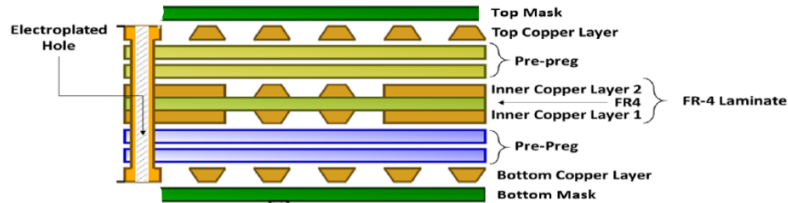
Cross-sectionals schematic of the PCB adapted from Moyo et al., 2020.
